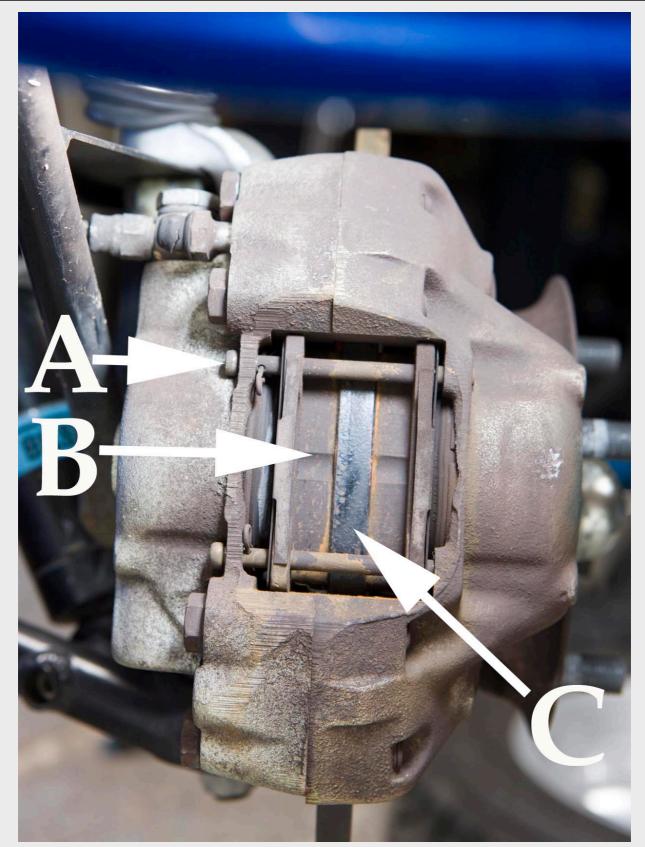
2-piston front caliper (this is right-hand side) seen from rear; metal shield, which slips beneath the pad-retaining pins has been removed; here pad wear can be assessed (arrowed).
